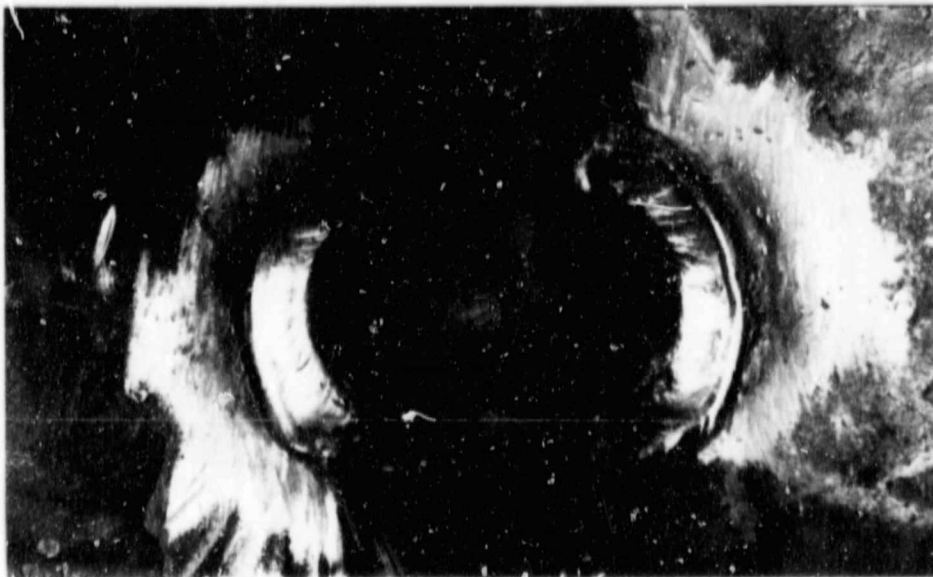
(b) Continuous type balance pad specimen with the weld toe hammer peened.
